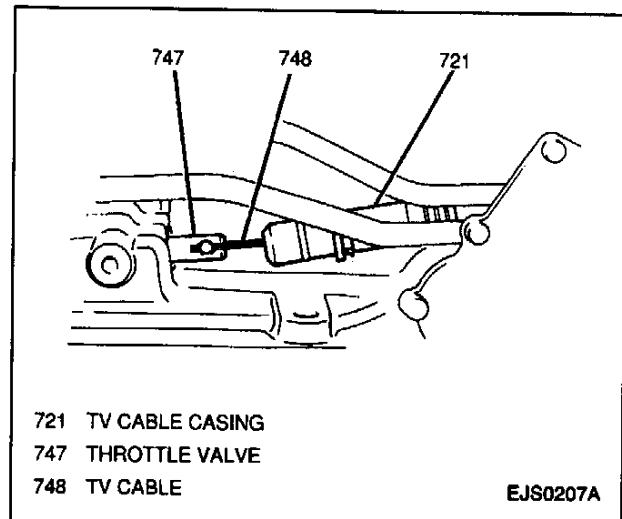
Removing TV Cable from Throttle Valve (3L30, 3-Speed)
